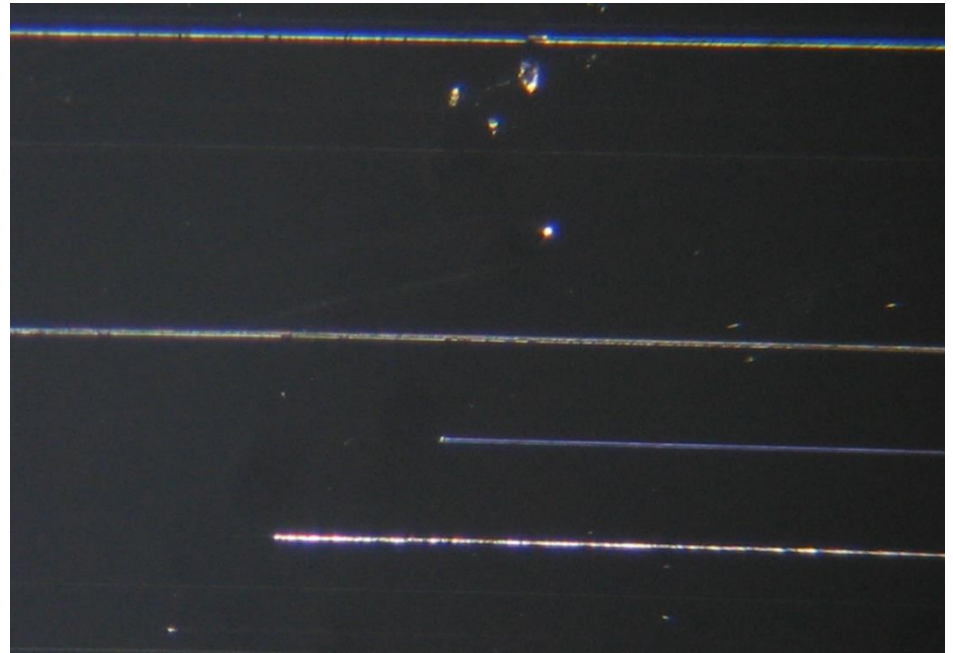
The roller side of this scratched tempered glass may have had over 500,000 microscopic roller side defects.
